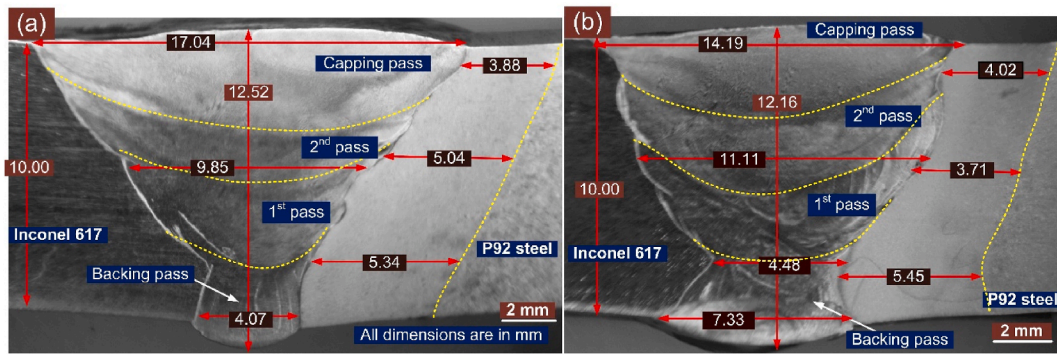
Weld cross-section showing a sequence of welding pass, weld metal, HAZ, and BMs for (a) VG weld, (b) NVG weld.
